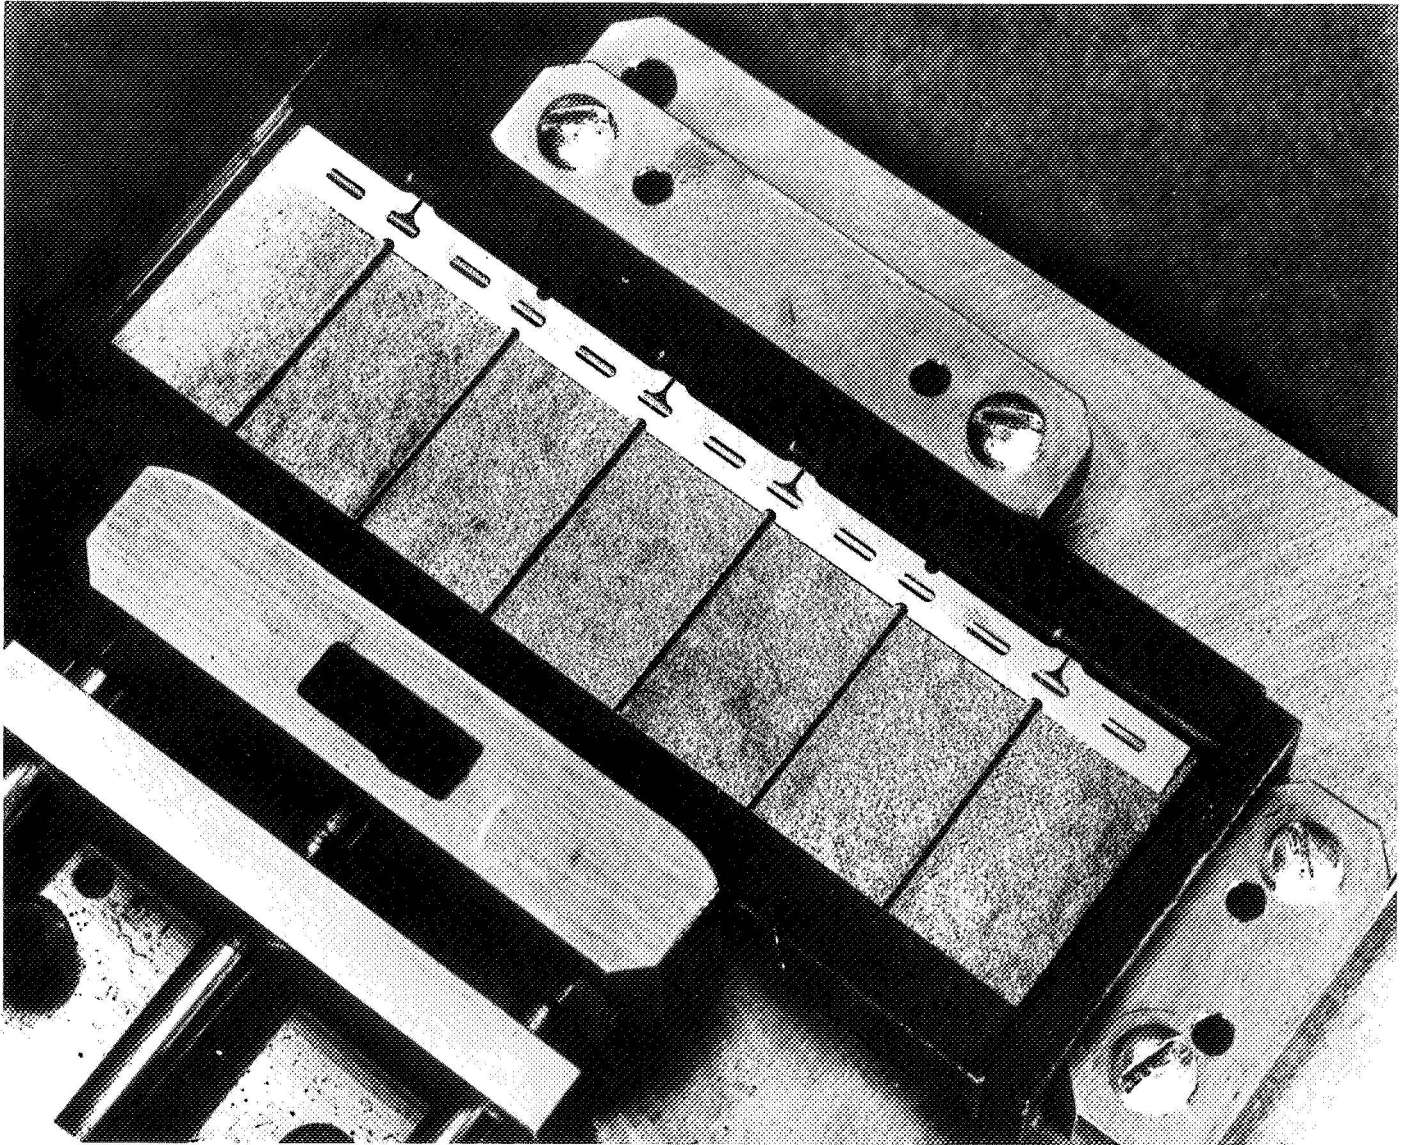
Solar cell submodule in soldering fixture before entering tunnel oven
